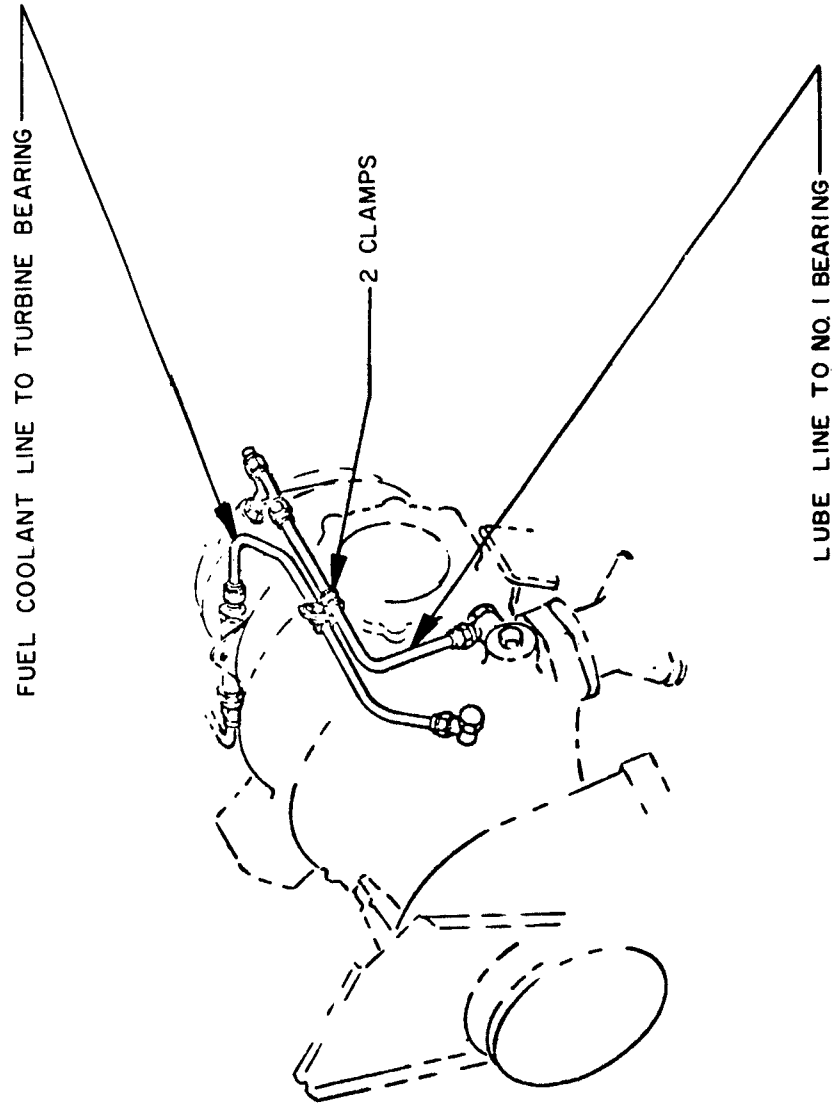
Fuel Coolant and Lube Supply Line Clamp
